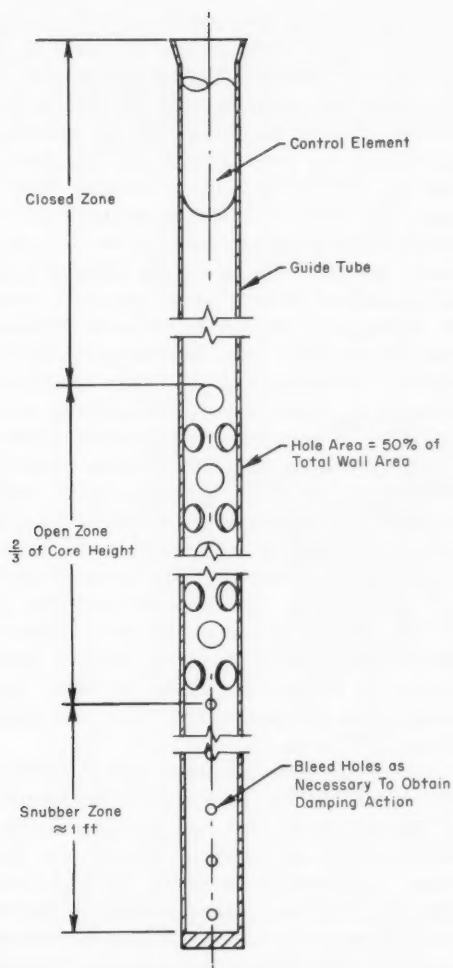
Guide tube for rod-cluster control.<sup>1</sup>
